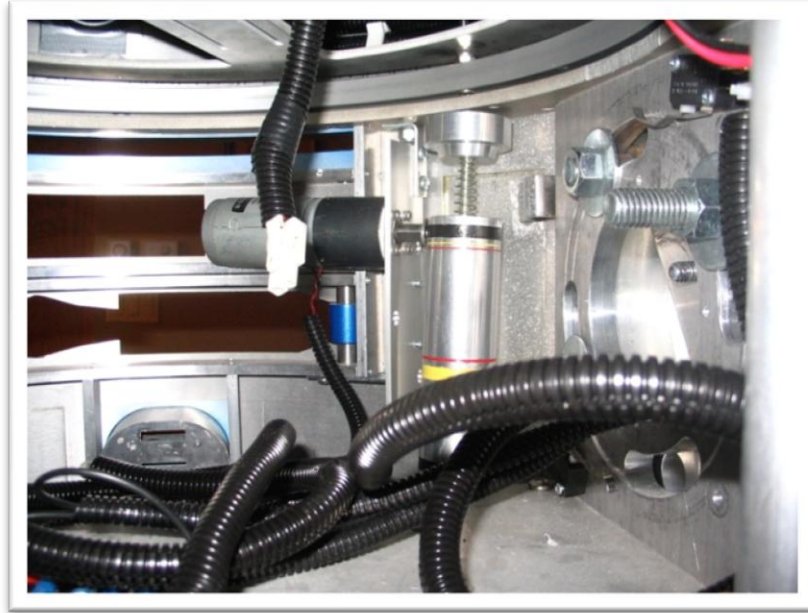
CPU arm mounted on the shaft of a gear motor - Photo by: Cory Pacione
